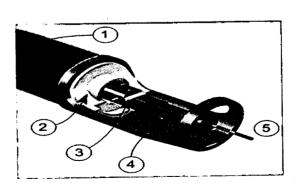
GMAW torch nozzle cutaway image. (1) Torch handle, (2) Molded phenolic dielectric (shown in white) and threaded metal nut insert (yellow), (3) Shielding gas nozzle, (4) Contact tip (5) Nozzle output fac.
